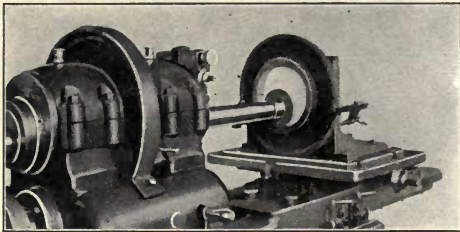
Grinding a hole in a large worm gear on a Heald cylinder grinding machine.
